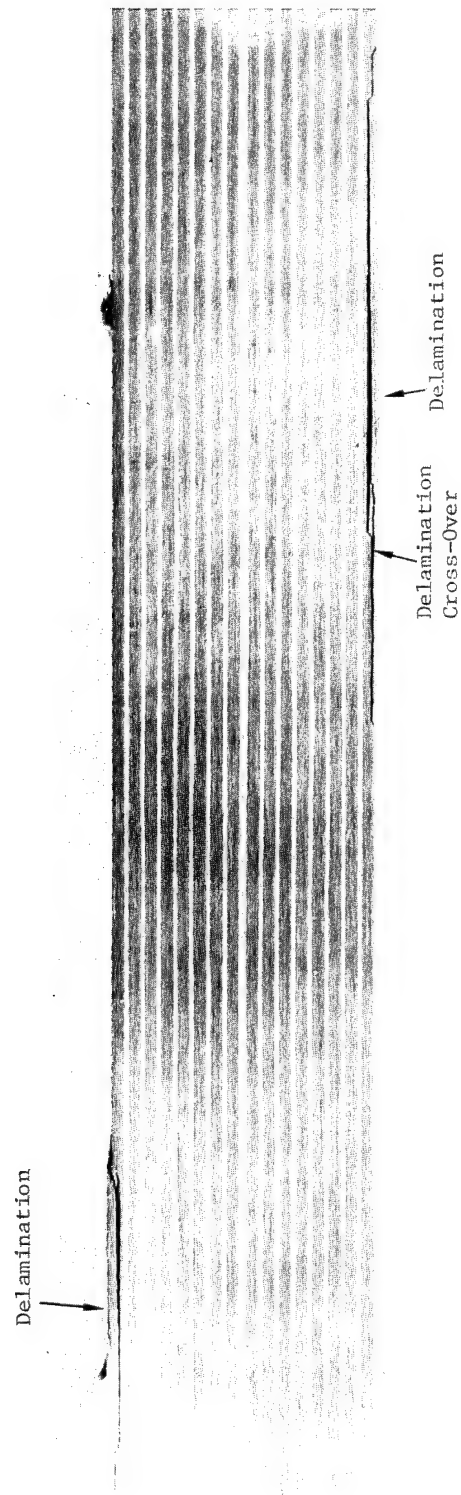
Photograph of a Laminate A Specimen (4284-70) after Fatigue Failure; Test Series 14
